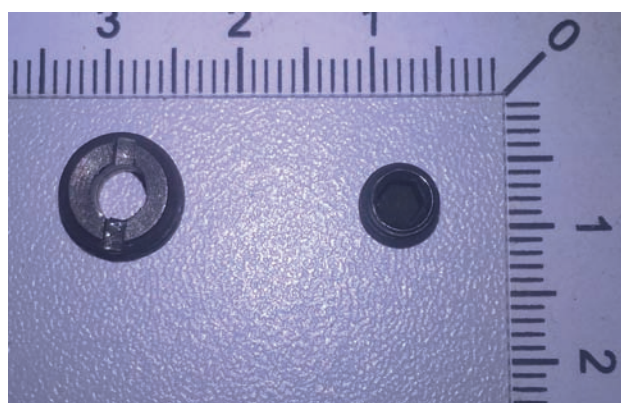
Plug centrally mounted in the muzzle and plug with a hex-key socket in the top of the barrel.
